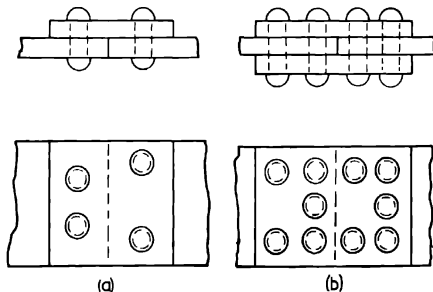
(a), Single-riveted butt joint, and (b), double-riveted butt joint.
